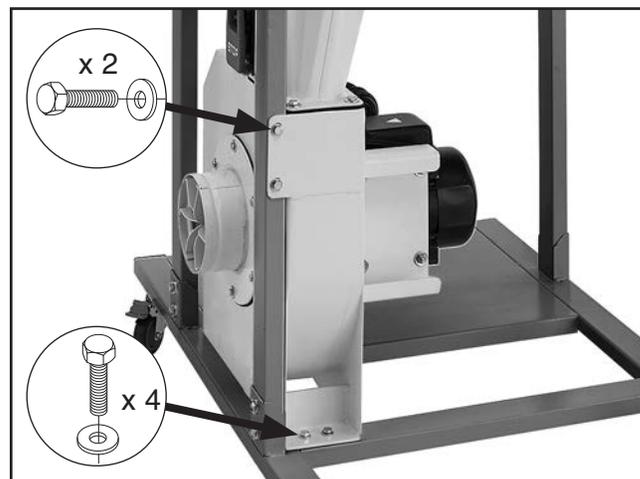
Motor/impeller housing attached to base stand and lower left front leg.
